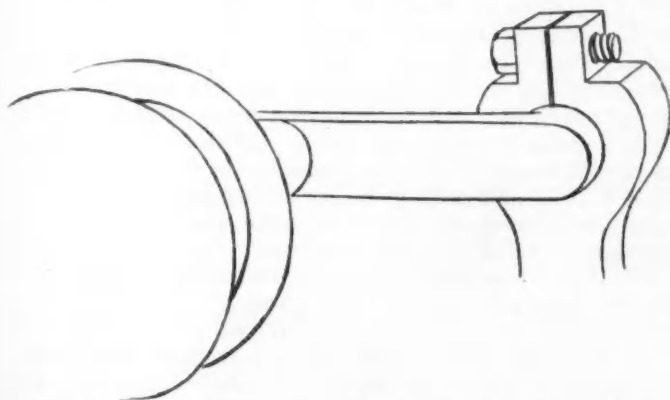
IN THIS TYPE OF ADJUSTMENT THE FAN BRACKET MUST BE HELD IN POSITION BY A SPECIAL TOOL WHILE THE LOCKING SCREW IS BEING TIGHTENED
